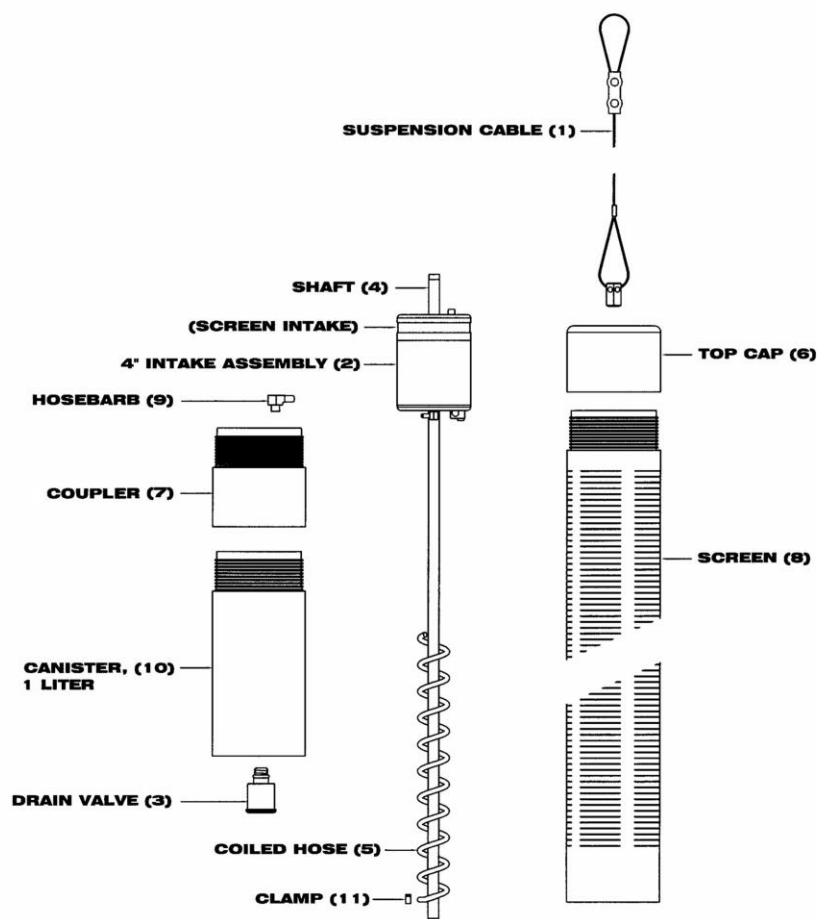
Standard 4" PRC Skimmer Assembly (1 Liter)
